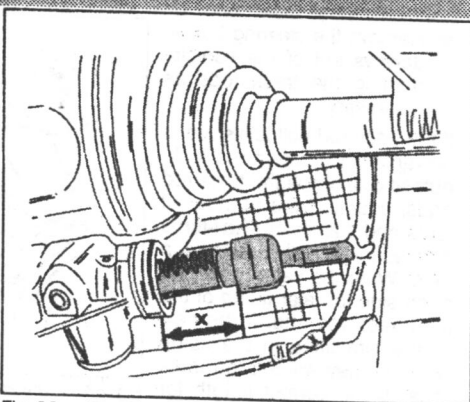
Turn the steering pinion until the end of the steering rack protrudes by 76.0 mm (dimension "X"). The rubber gaiter must be removed to measure.
